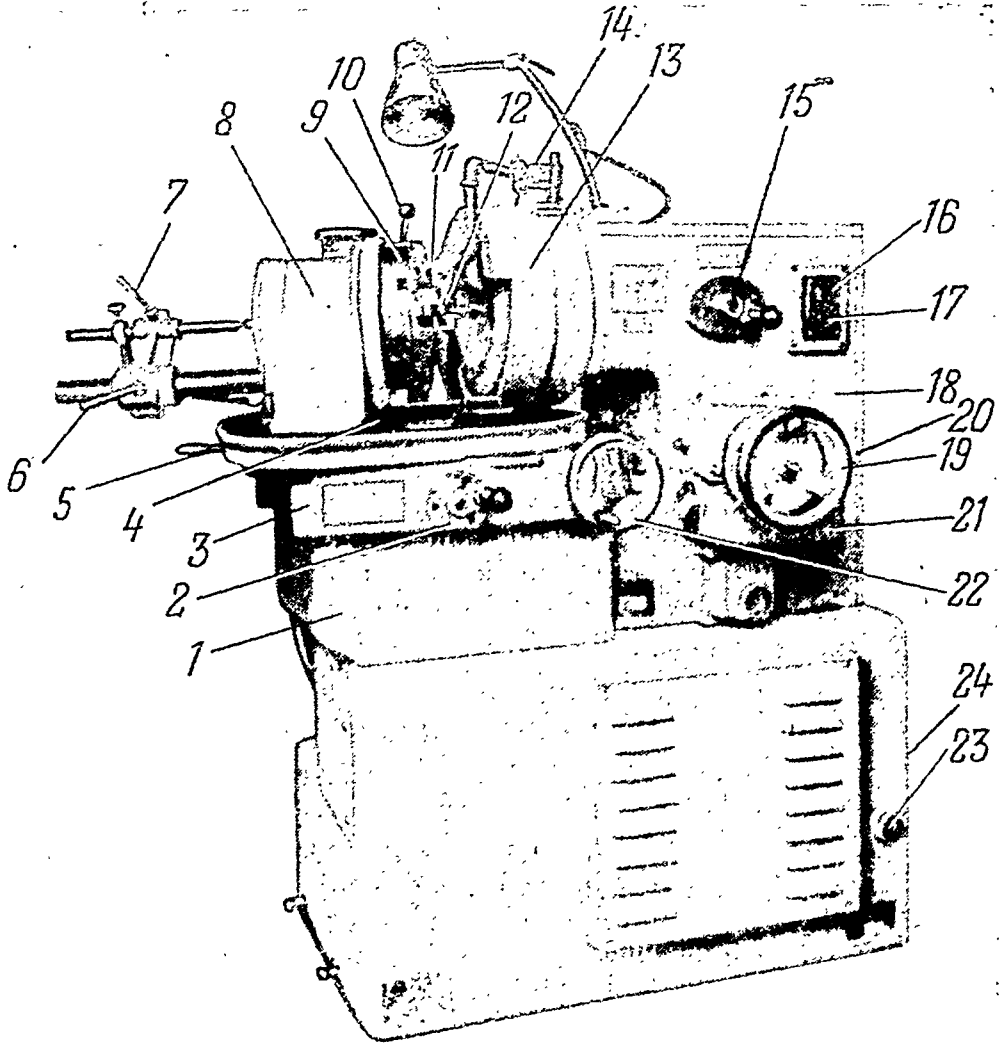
Semiautomatic grinder, model 3659A, for sharpening twist drills and core drills: 1—base; 2—lever for setting the sliding key of the gearbox; 3—carriage; 4—nut for clamping the swivelling member of the carriage; 5—handle for swivelling the carriage member; 6—lever for clamping the rear centre bracket; 7—lever for clamping the rear centre; 8—chuck; 9—lever for operating the chuck jaws; 10—handle of the wheel dressing mechanism; 11—swinging stop; 12—nut for adjusting the stop to the web thickness; 13—wheel spindle; 14—coolant cock handle; 15—lever for setting to the lip relief angle; 16—START push button; 17—STOP push button; 18—wheelhead; 19—handwheel for engaging the power infeed, chuck rotation and the planetary and axial motion of the wheel spindle; 20—lever for setting the rate of infeed; 21—infeed mechanism; 22—handwheel for carriage traverse; 23—screw for adjusting the spring of the idler pulley; 24—main line switch
